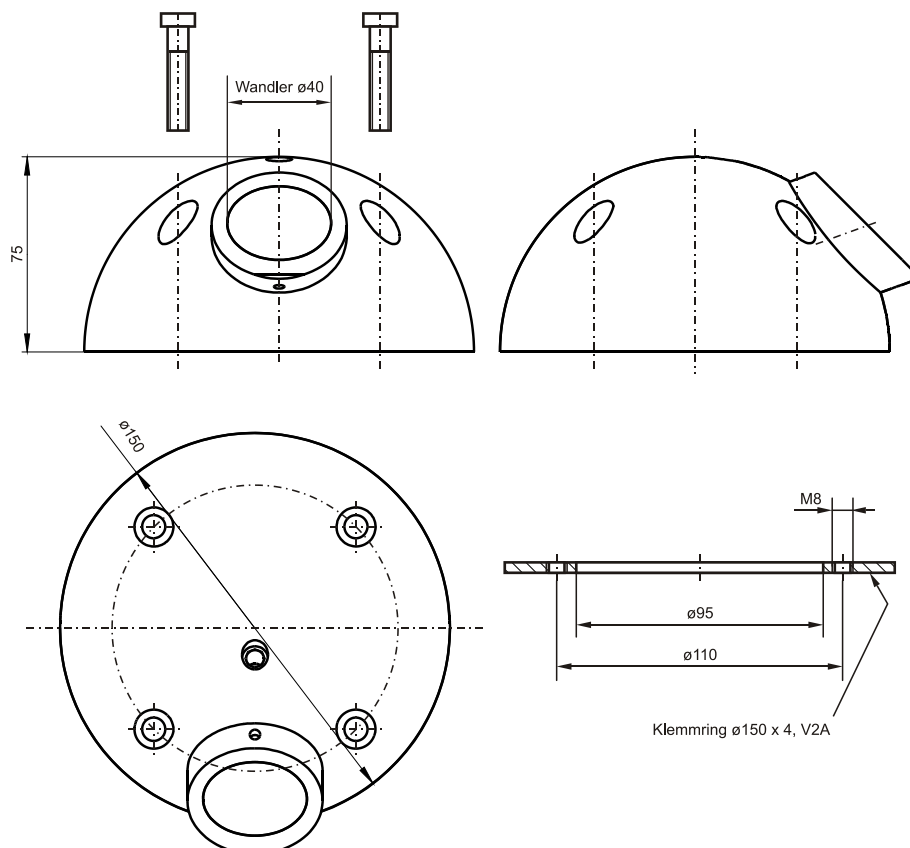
Dimensioned drawing hemisphere sensor Type NOS-V30B \varnothing 40 mm
